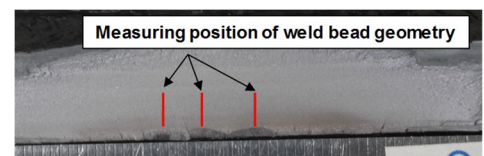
Example of fracture surface and measuring position of weld bead geometry
